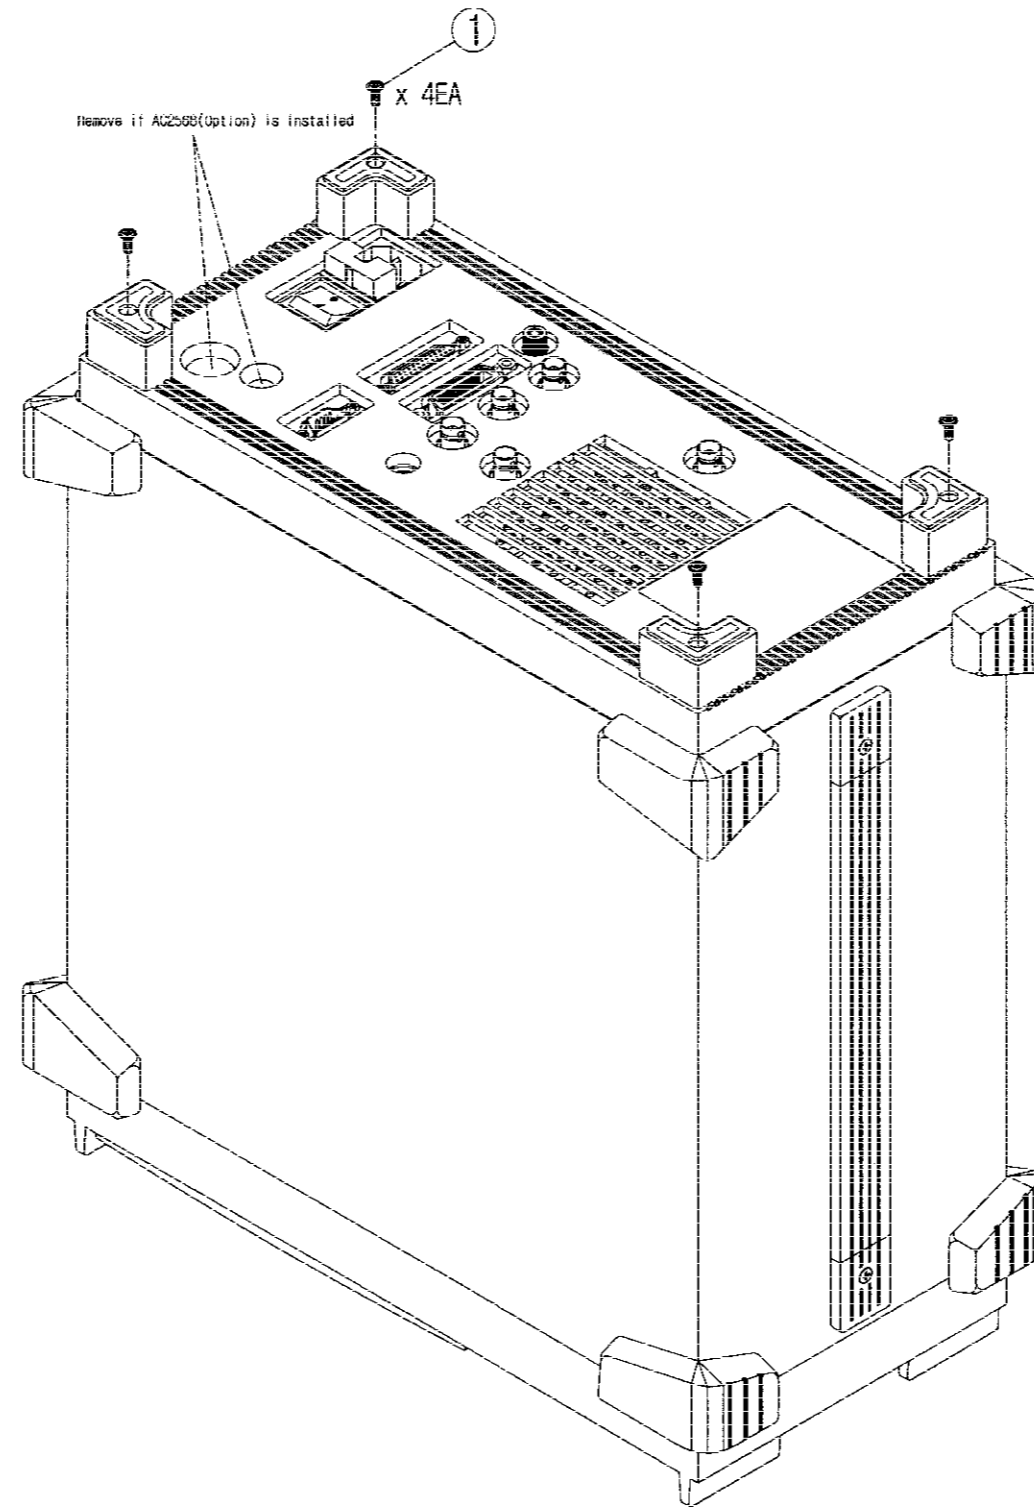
REAR PANEL ASSEMBLY
